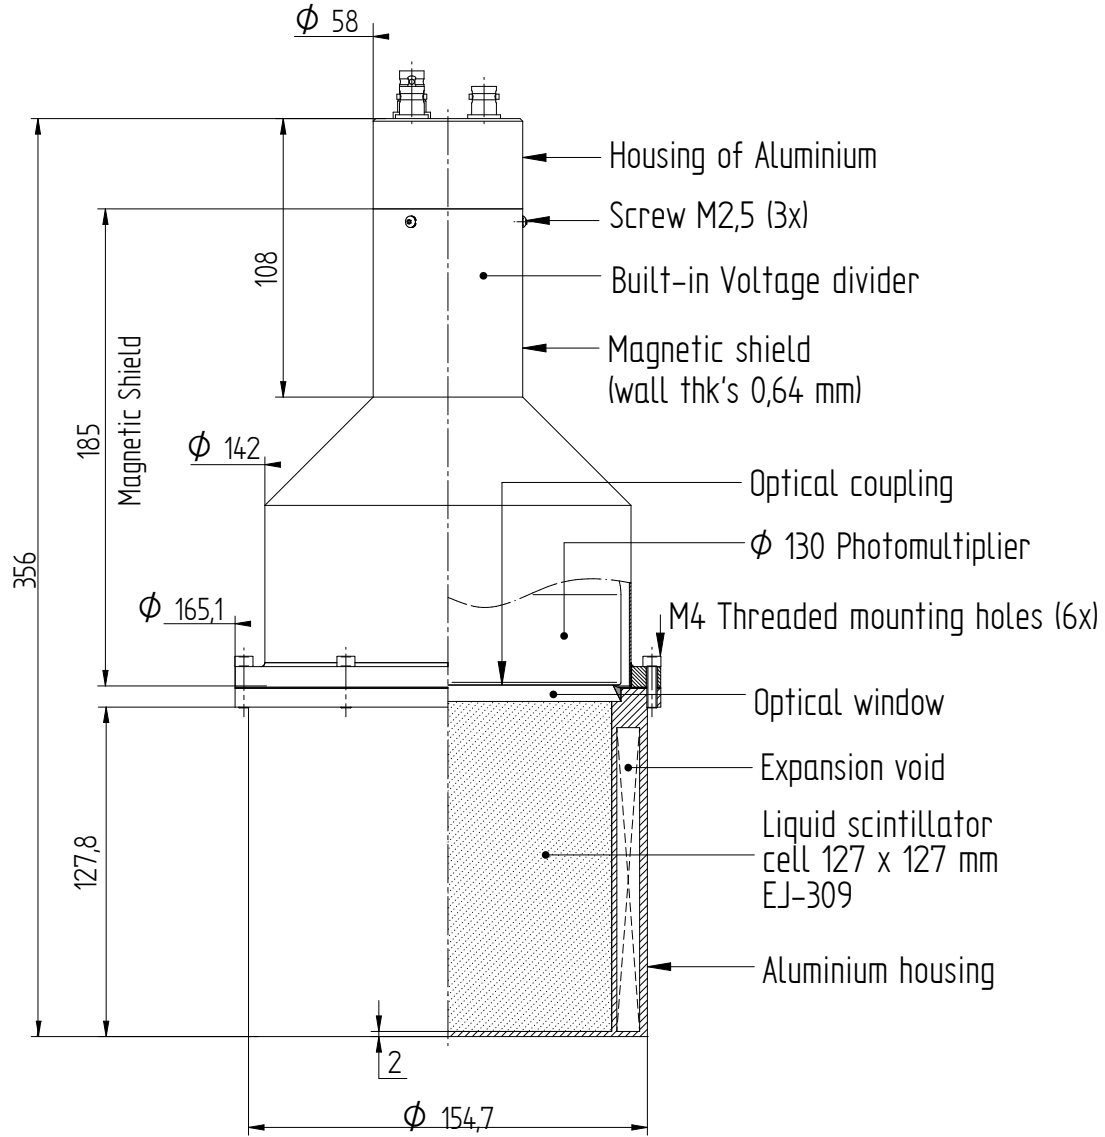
The technical drawing of an EJ-309 liquid scintillator unit used in this work. Courtesy of Scionix Holland B.V. TM.
